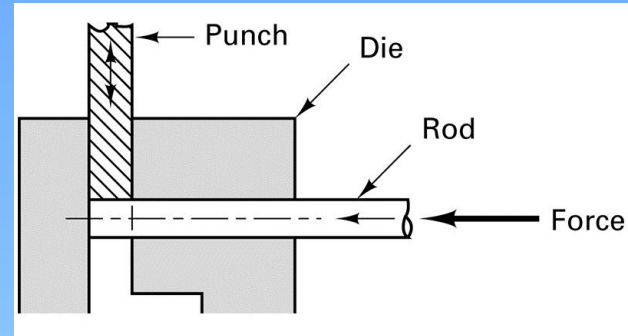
Method of smooth shearing a rod by putting it into compression during shearing.
